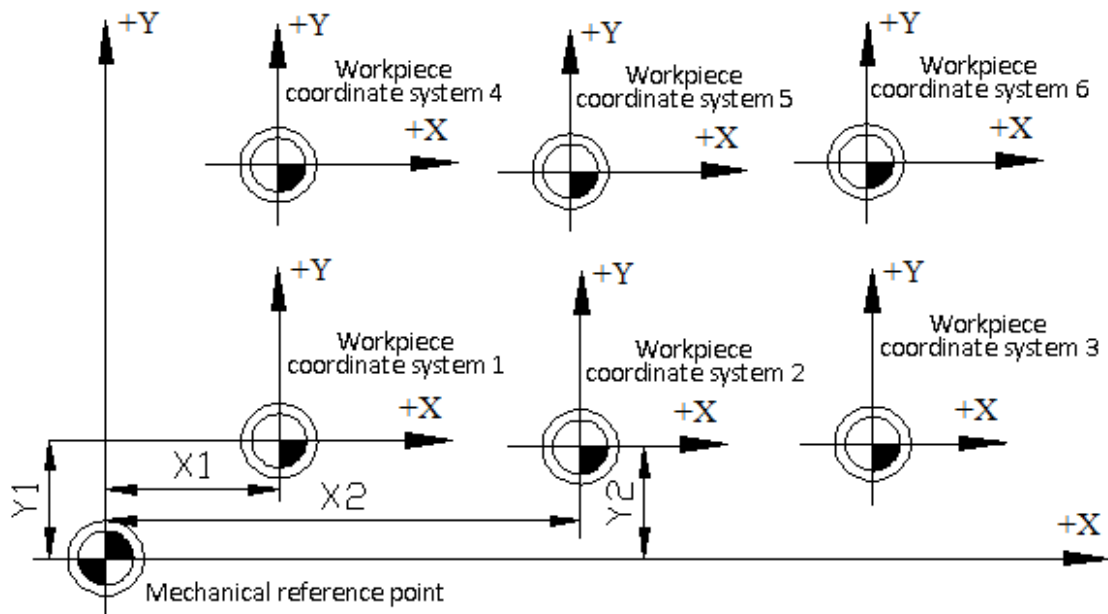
Mechanical Coordinate System and Workpiece Coordinate System
